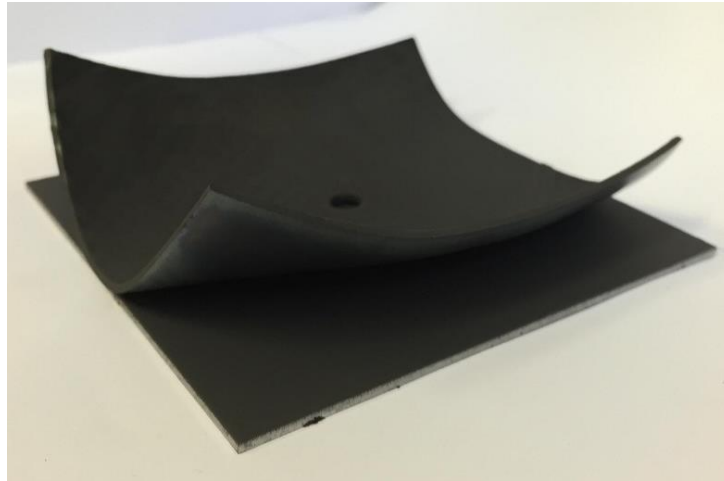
Final formed shape by using the modified scanning strategy in test 2
